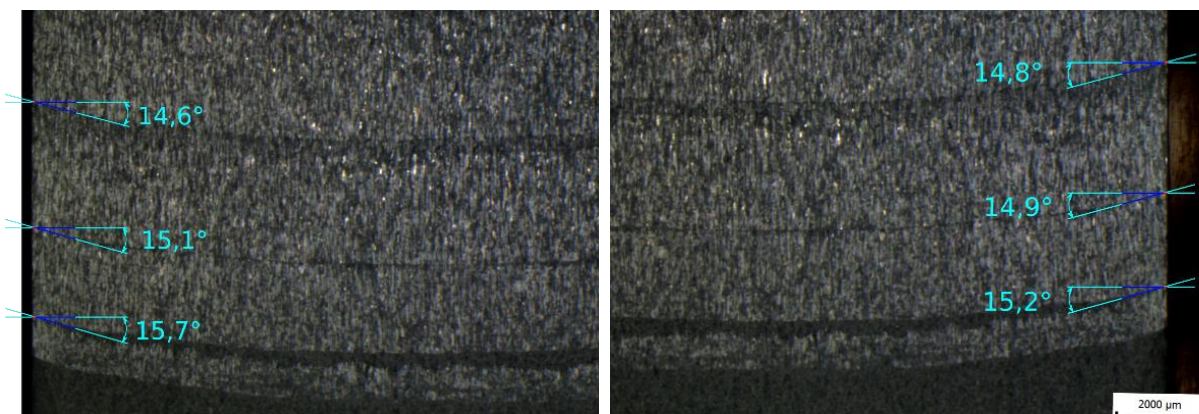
Beach marks show the shape of the fatigue crack front on aluminium SENB specimen ( $\nu = 0.395$ )
